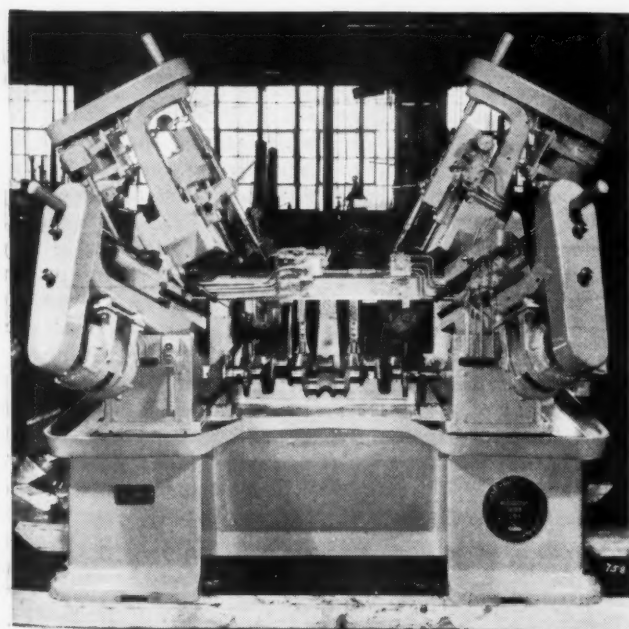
SIX-SPINDLE MACHINE FOR DRILLING AT ONE SETTING ALL OIL HOLES IN THE CRANKSHAFT OF A SIX-CYLINDER ENGINE
